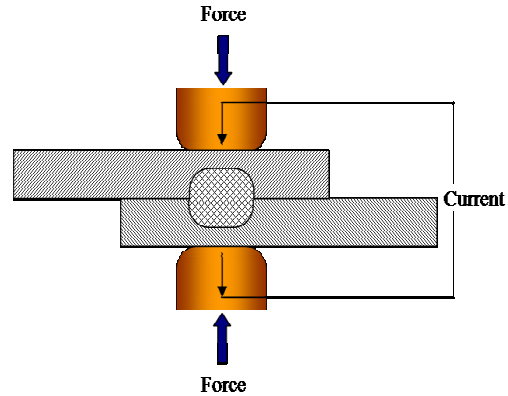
A spot weld process by which a weld (pool) is created at the interface of the work-pieces.
